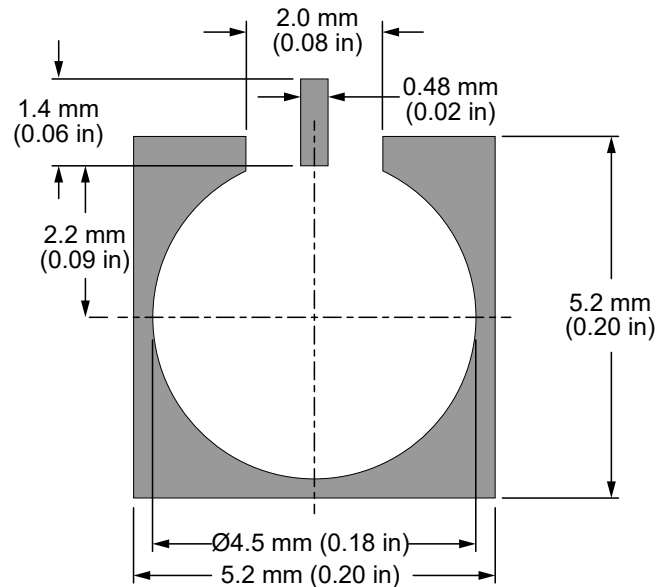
Recommended PCB Dimensions for the CONSMP001-SMD-G-T
